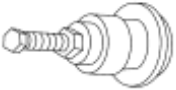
Identifying Special Tool (303-D055) And Crankshaft Pulley Bolts
